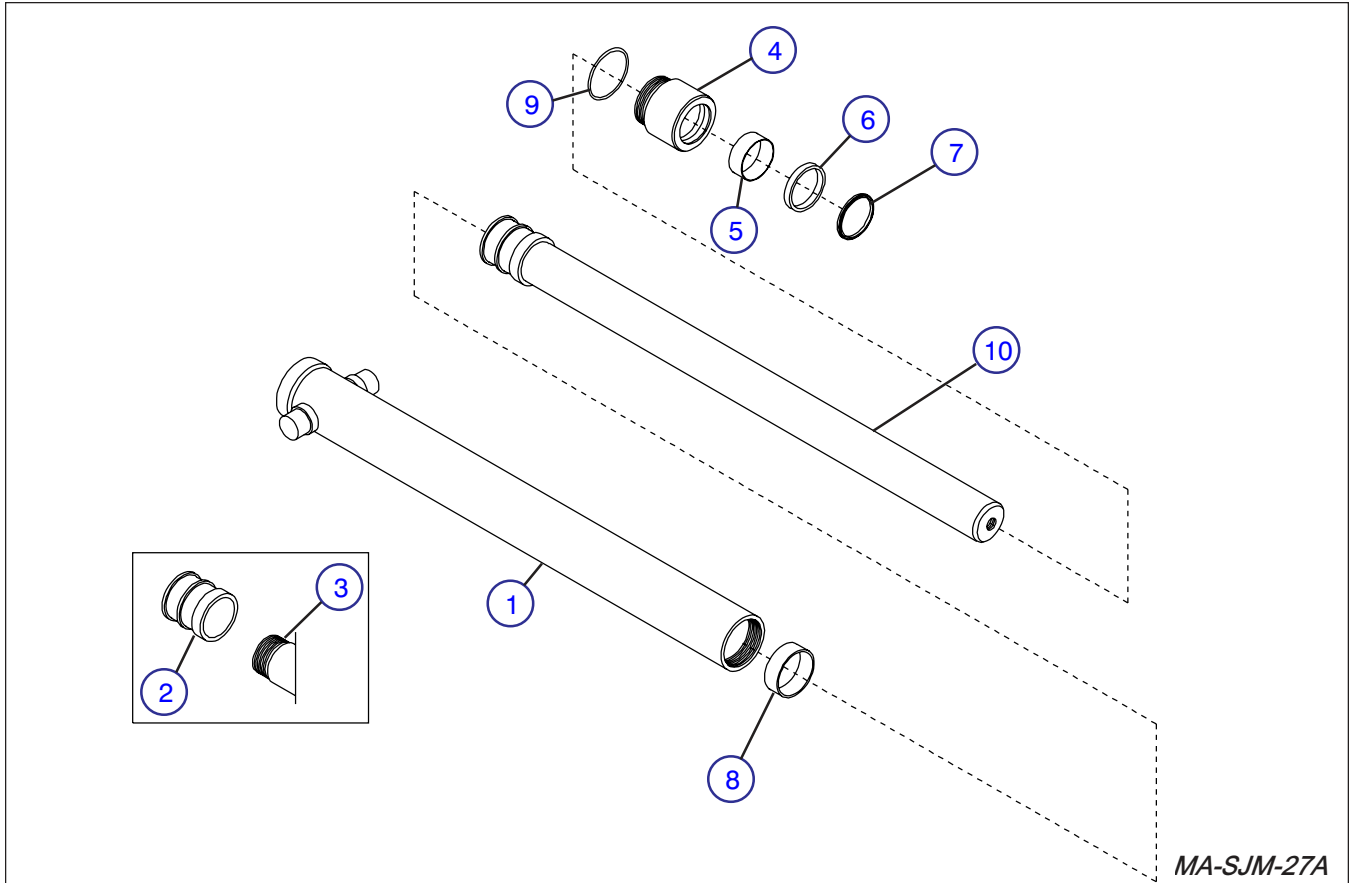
LIFT CYLINDER ASSEMBLY - Model 3015
